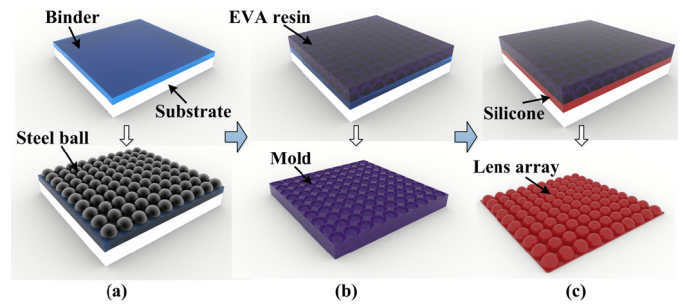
Fabrication process of the milli-lens array. (a) Fabrication of steel ball array. (b) Fabrication of EVA mold. (c) Realization of millilens array.
